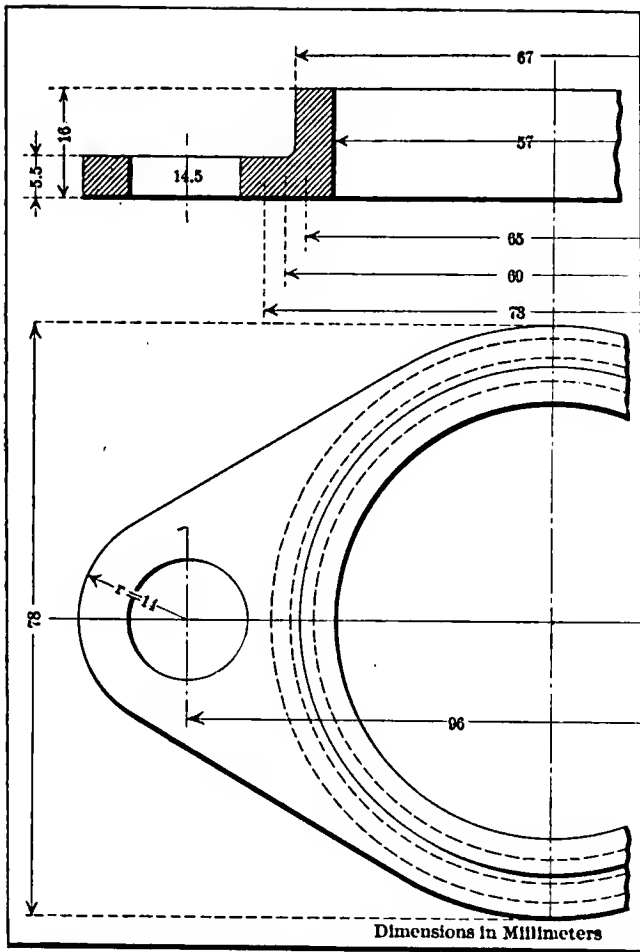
Pressed steel flange for use with inlet and exhaust manifolds of motors
